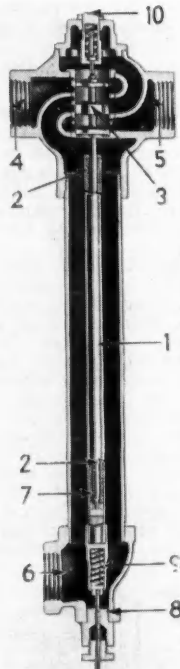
Self-actuated blender, or diversion valve: 1, Thermostat; 2, push rod; 3, piston valve; 4, valve body, cold inlet; 5, hot inlet; 6, outlet; 7, bellows tubing; 8, temperature setting; 9, relief spring; 10, cap.
